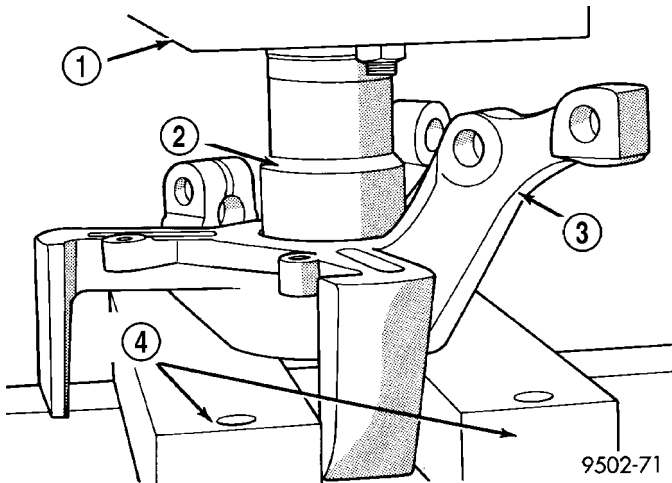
Wheel Bearing Removal From Steering Knuckle
